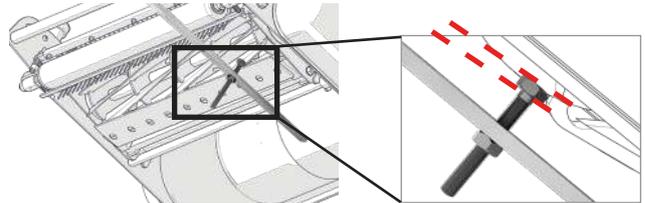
C - Position the setting bar and observe distance between the top of the shear blade and bottom on the bolt head. In this example, the bolt head is below the shear blade, indicating the machine cut height is currently too high and therefore needs lowering.
